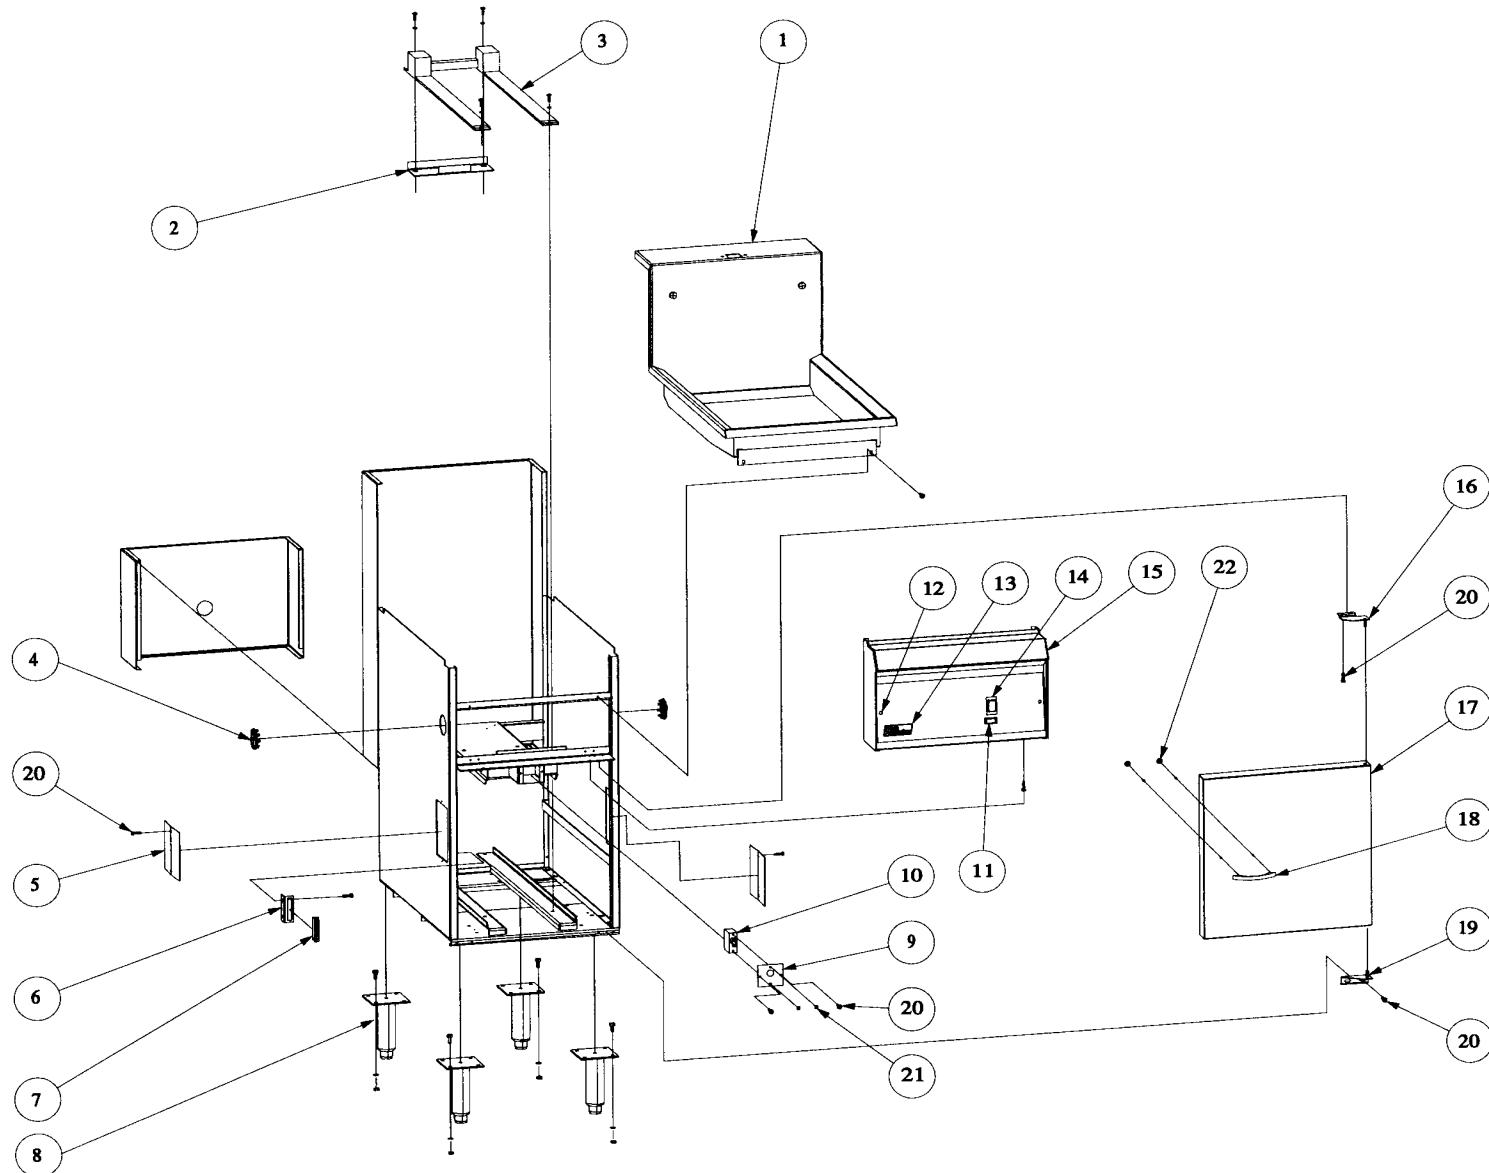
Frame-Cabinet / Electrical Assemblies With Components
